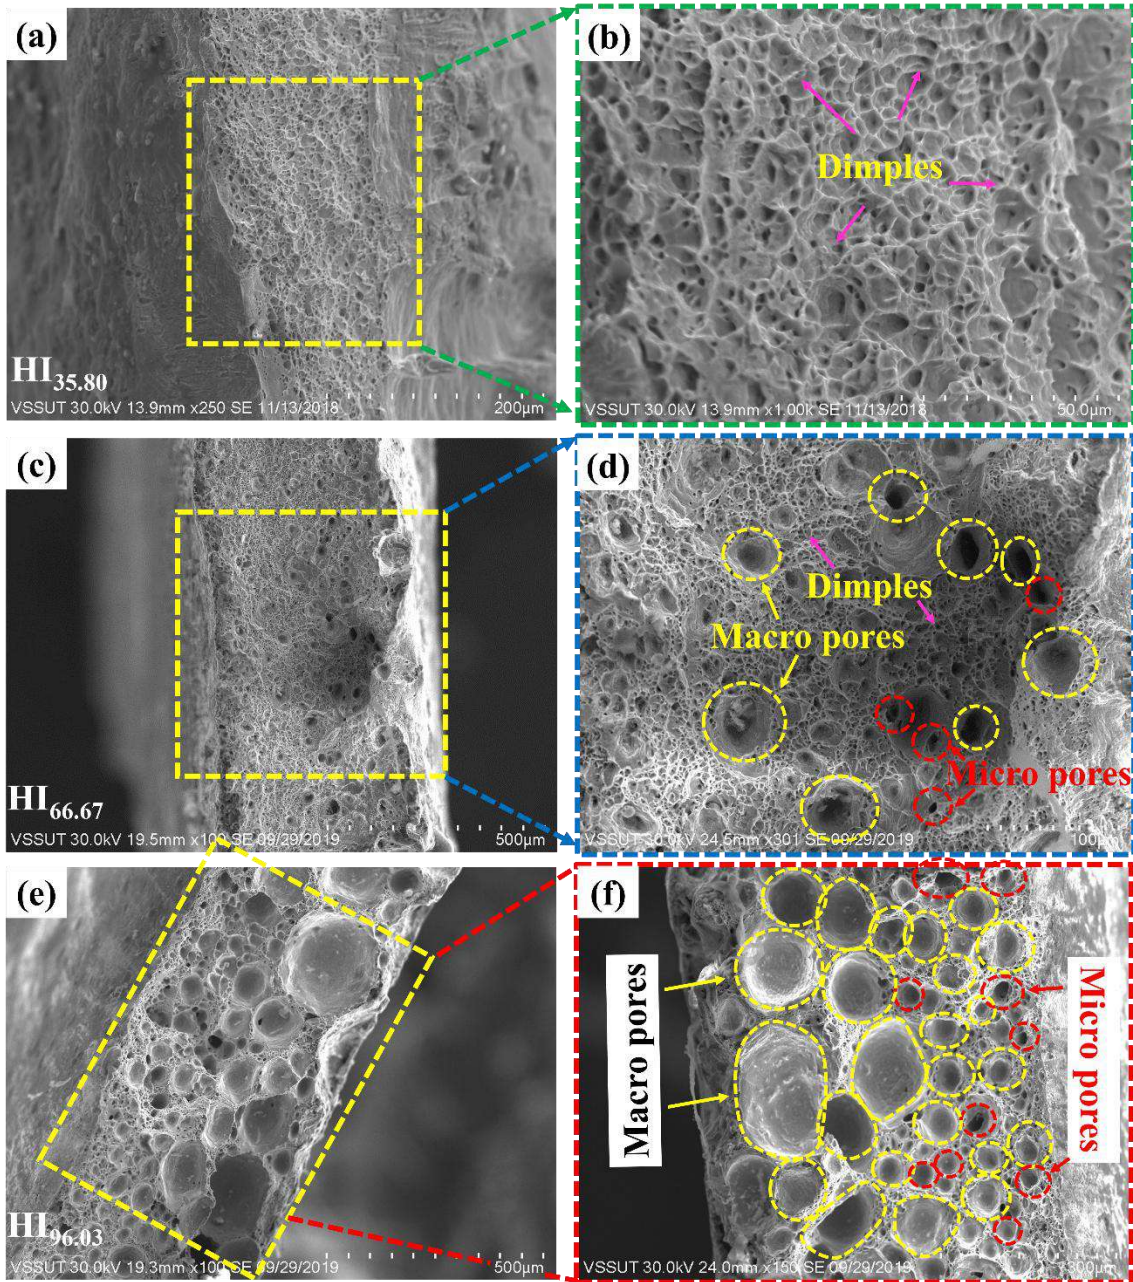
Illustrates the fracture surface for the joints assembled at different weld conditions (a, b) HI_{35.80}, (c, d) HI_{66.67} and (e, f) HI_{96.03}.
